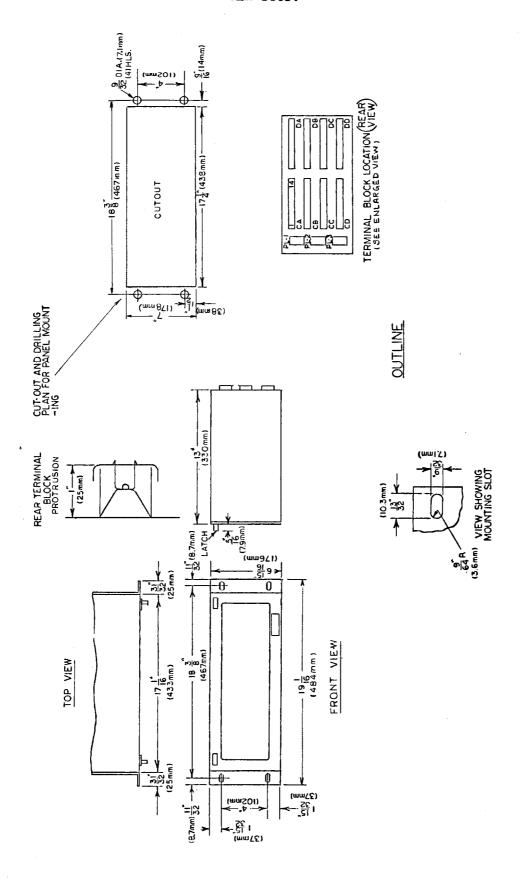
(0183B3626-0) Outline and Mounting Dimensions
